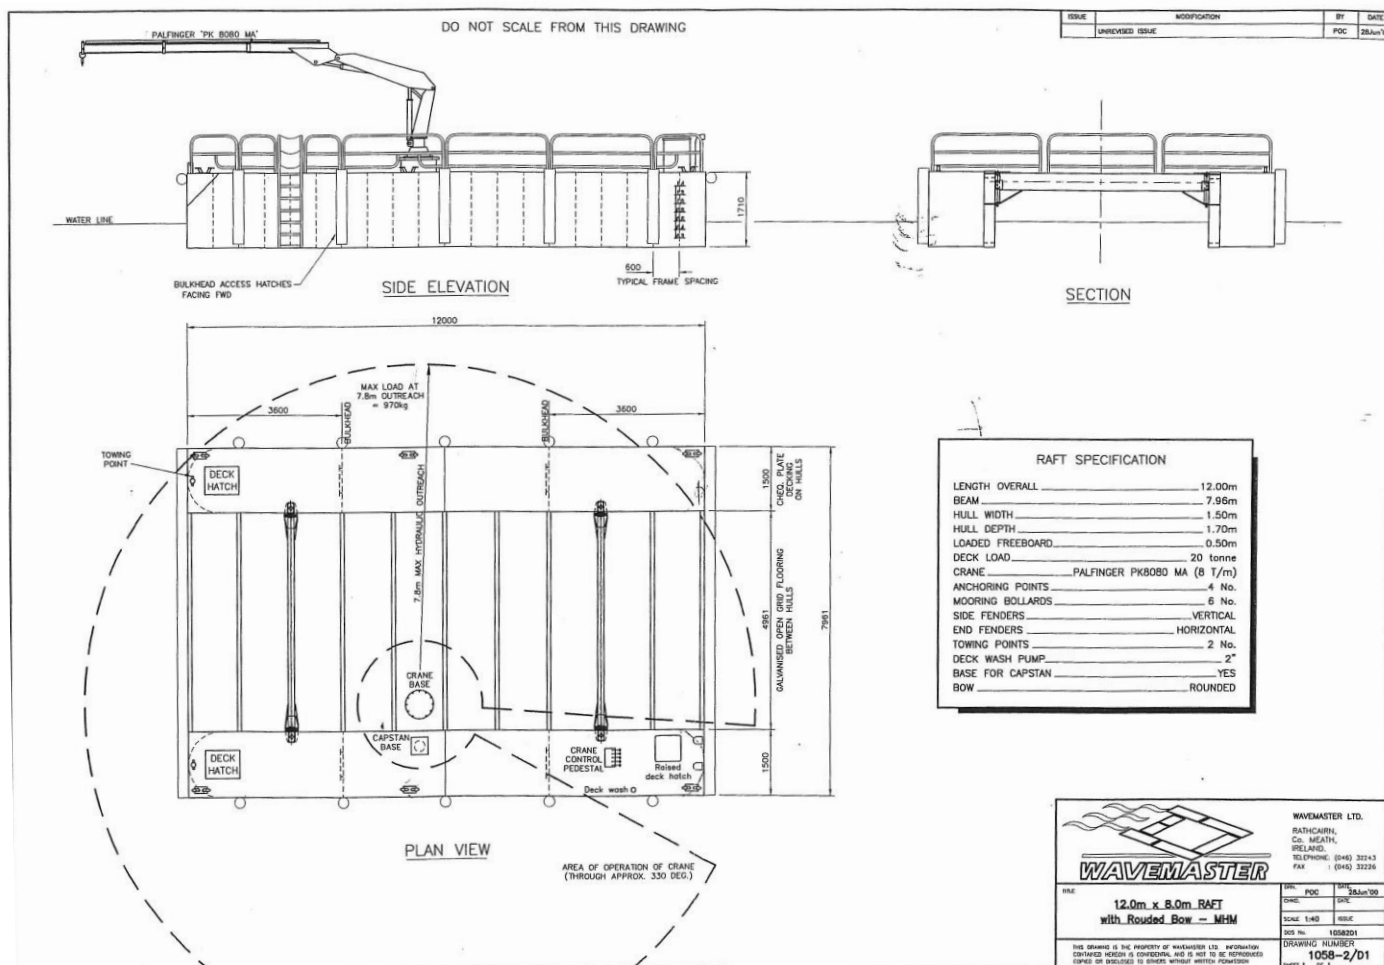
EXISTING & PROPOSED: Plans of a typical Wavemaster Raft
